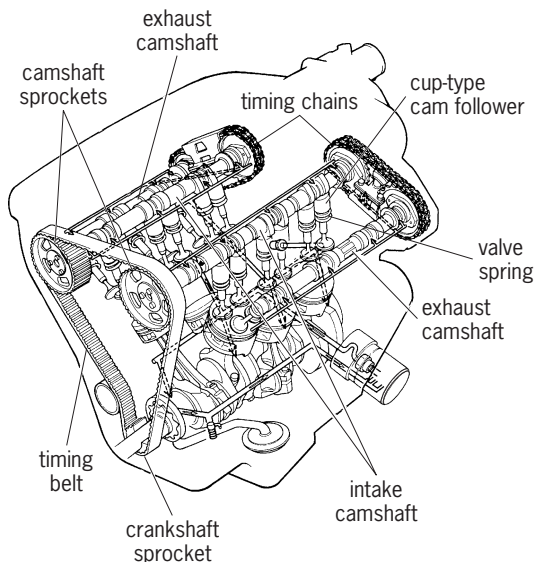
Valve train of a V-6 four-cycle engine with the valves and two camshafts located in each cylinder head. The cams act directly on cup-type cam followers to open the valves. (Ford Motor Co.)
